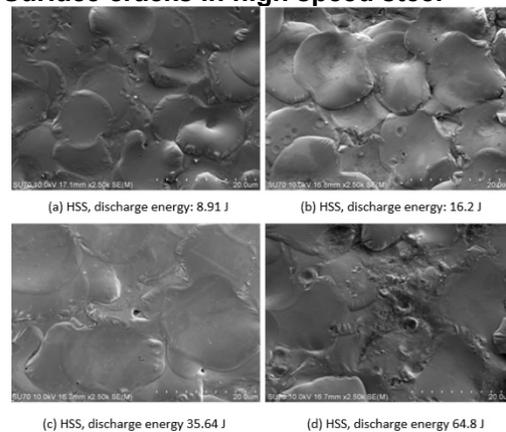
Micro-EDM surface cracks in HSS materials
